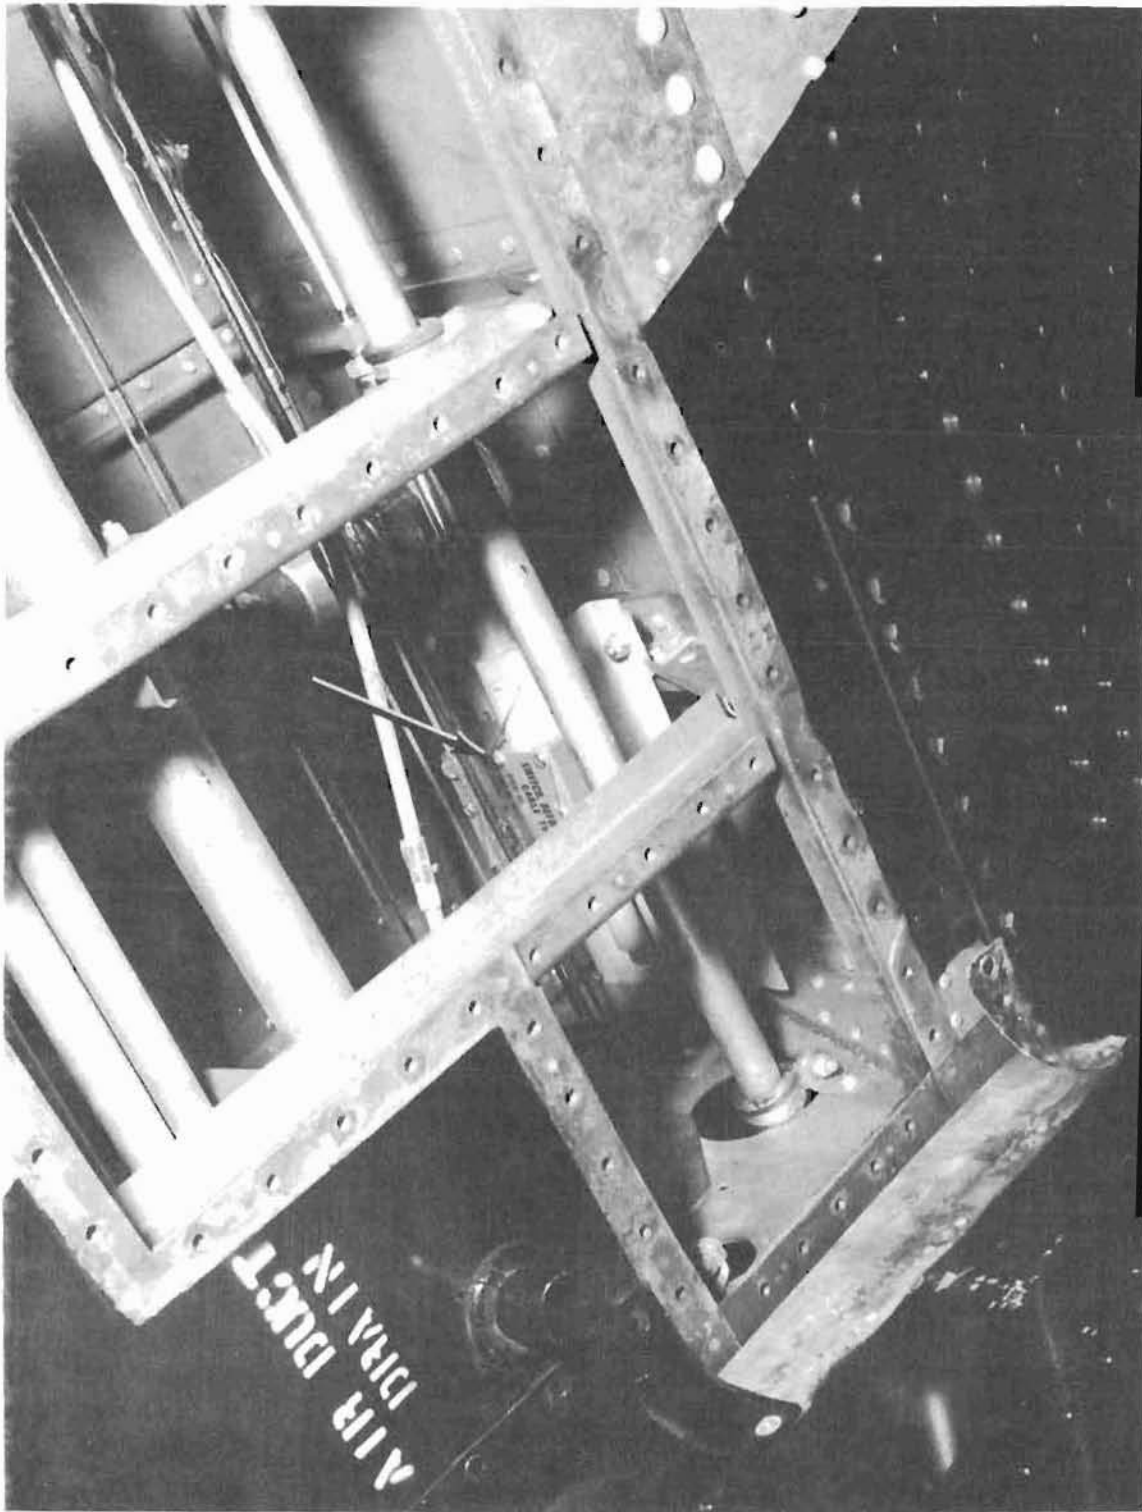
Right Wing Inboard Cable Switch (Switch End)
